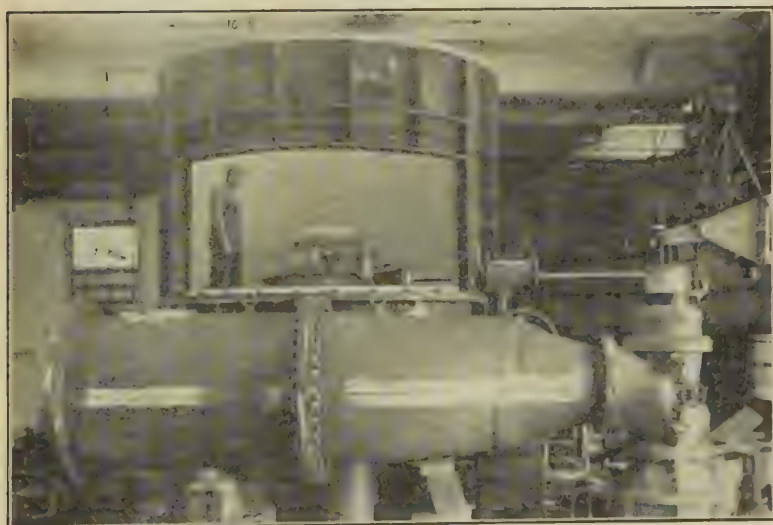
Arc-welded generator support for 10,000-hp. hydraulic turbine.
